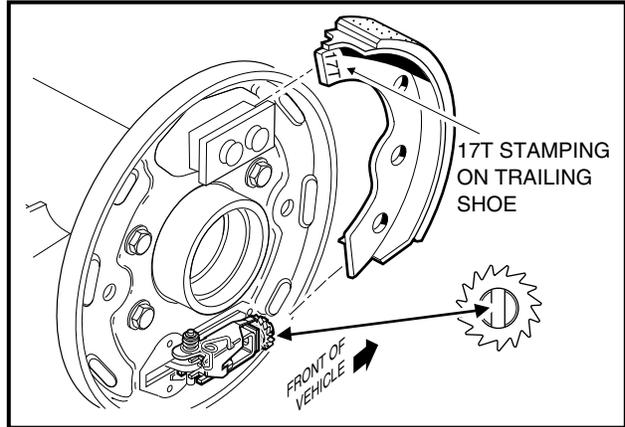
Install Adjuster Wheel, Trailing Shoe
